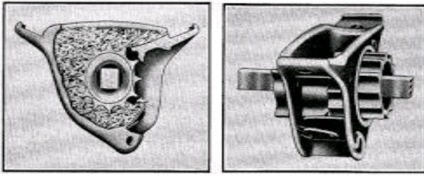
Fluted-wheel type of seed-metering device. (Deere & Co.)
